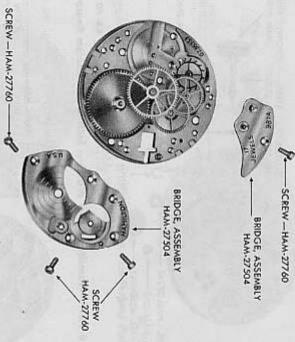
Hamilton Wrist Watch — Winding Wheel and Click Assembly Removed
